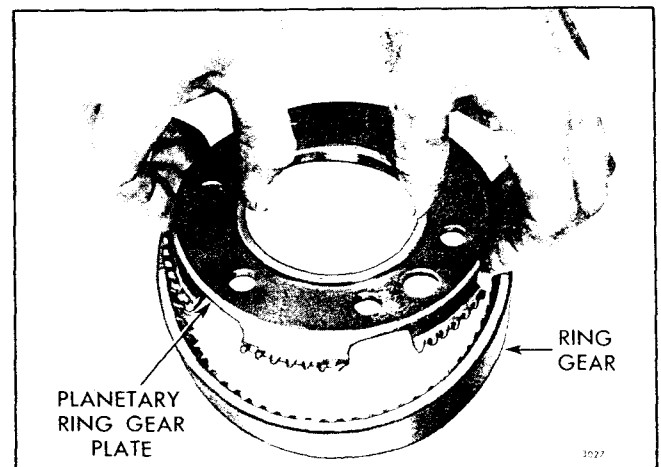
Installing Reduction Gear Planetary Ring Gear Plate in Ring Gear (2.5:1 and 3:1 Ratios)
